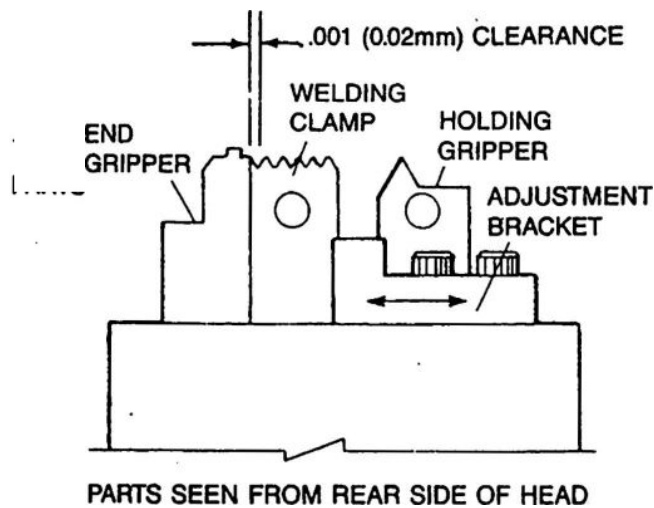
WELDING CLAMP AND END GRIPPER CLEARANCE
